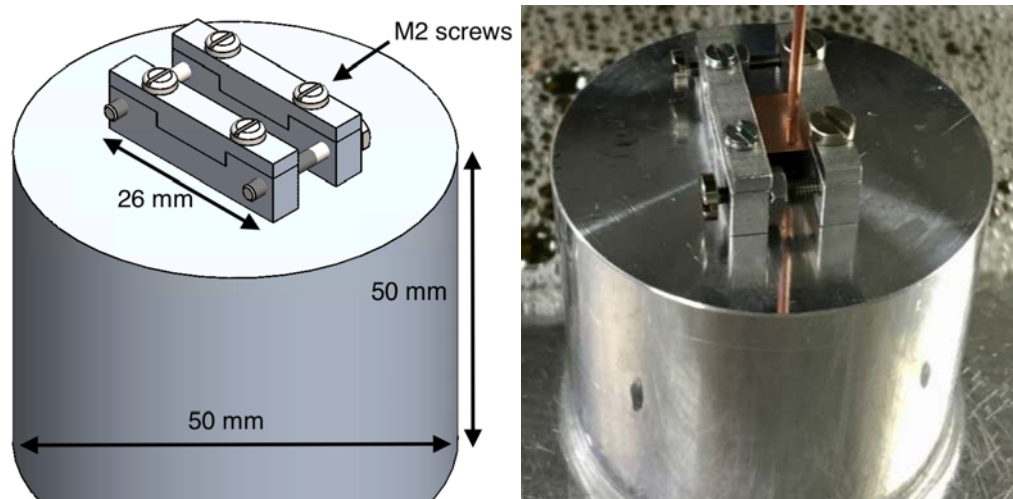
The foil clamping device is designed to hold 20 mm width and 20 mm length graphene coated copper foil. The drawing of the holder is on the left and the holder during experiments is on the right.
